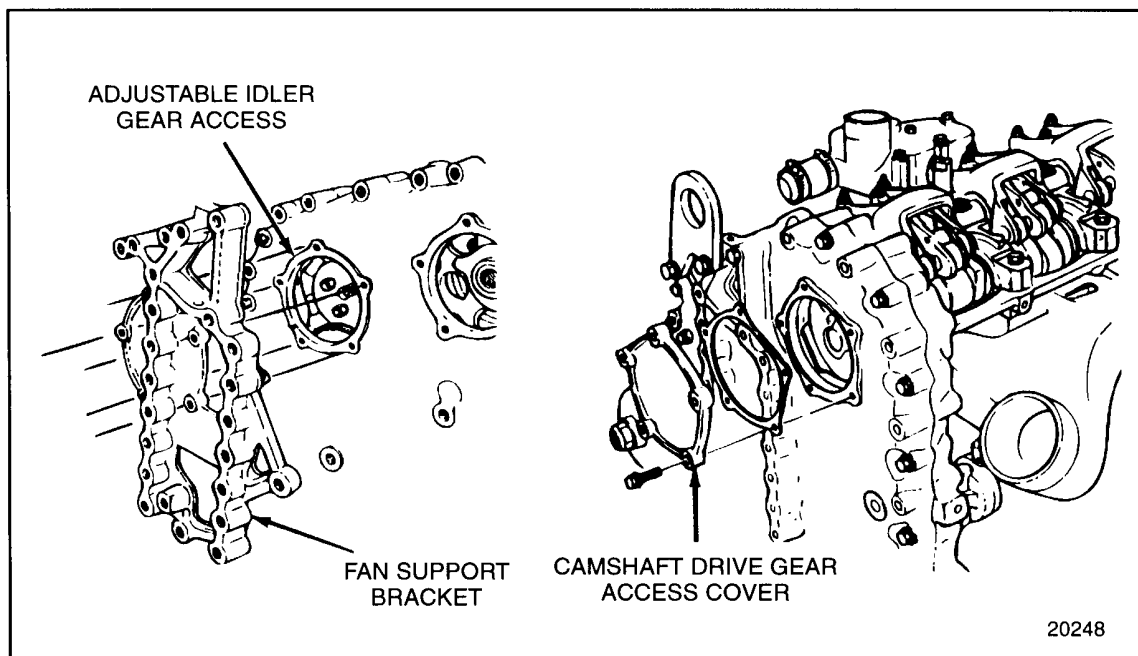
Camshaft Drive Gear Access Cover and Adjustable Idler Gear Access
